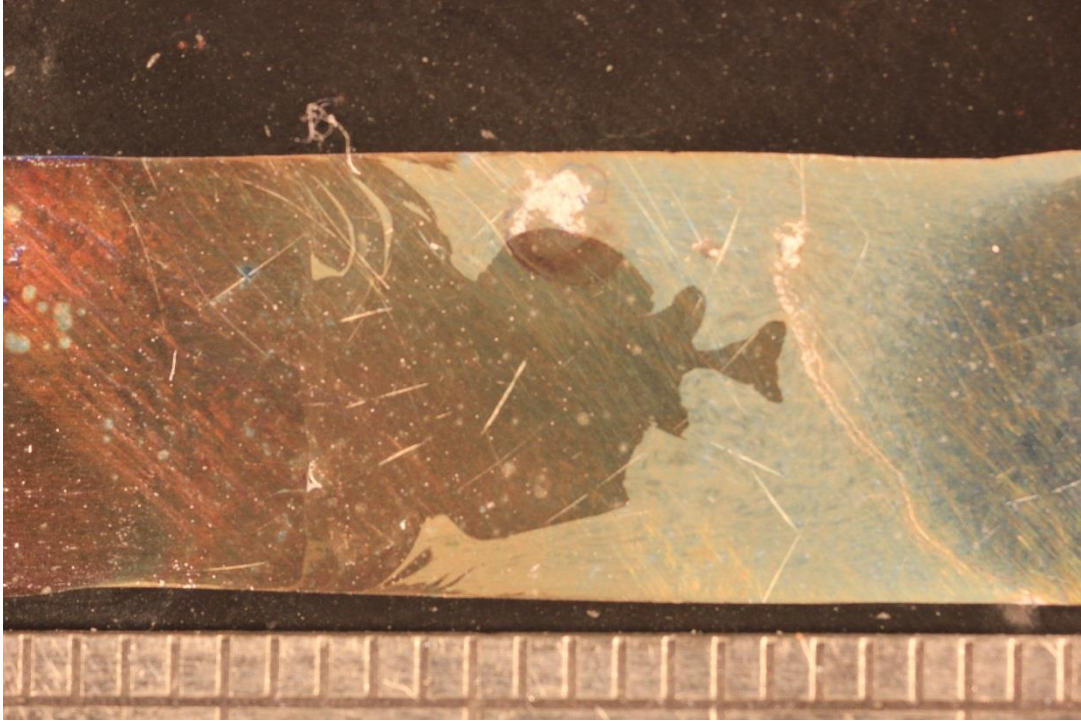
Macrograph of Weld 1 Sample 9
